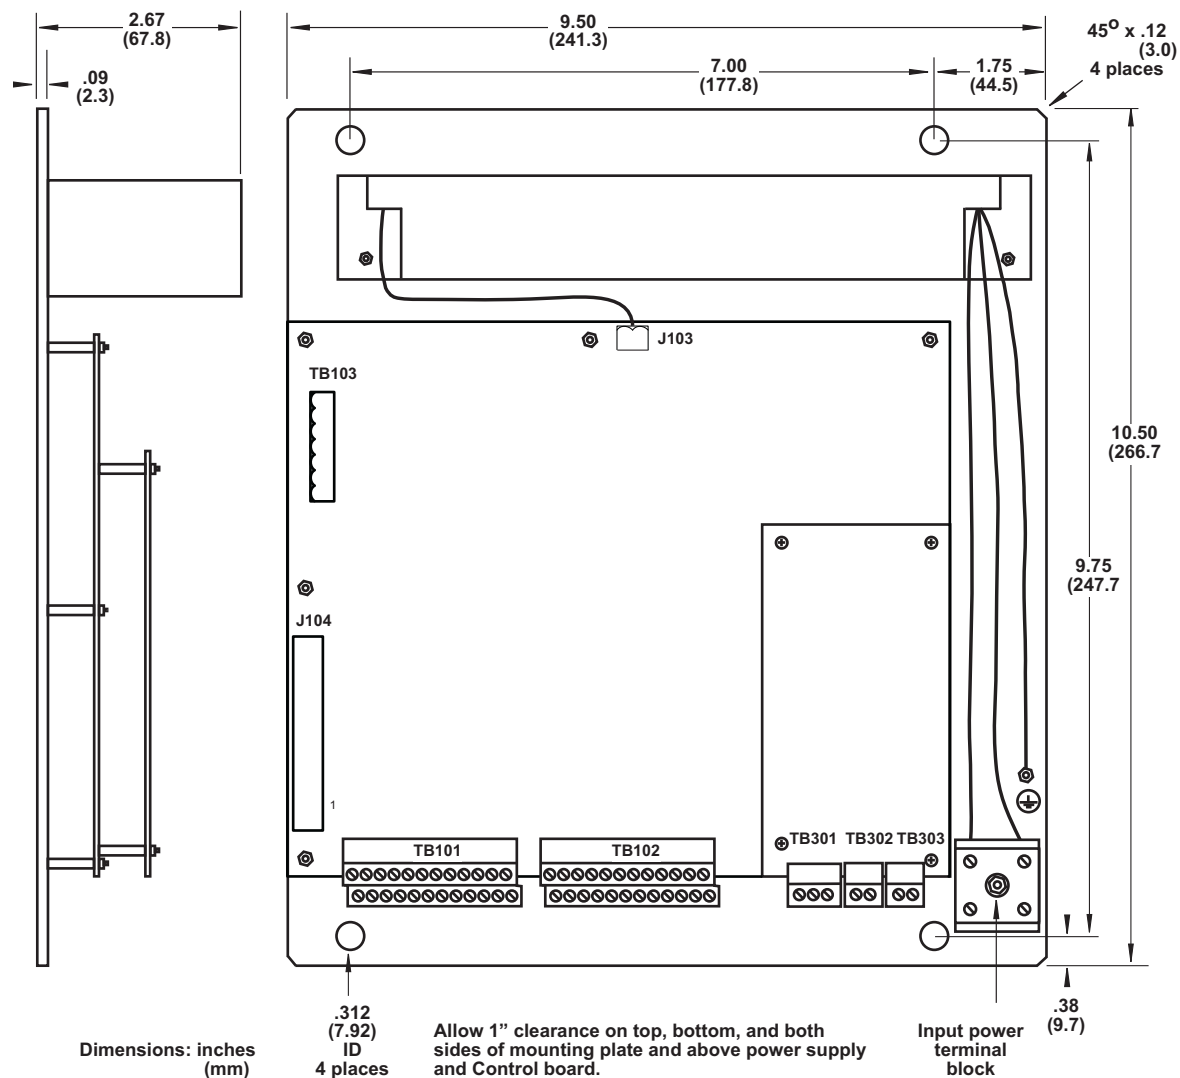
WPC 1000 Mounting Plate: Mounting Dimensions
